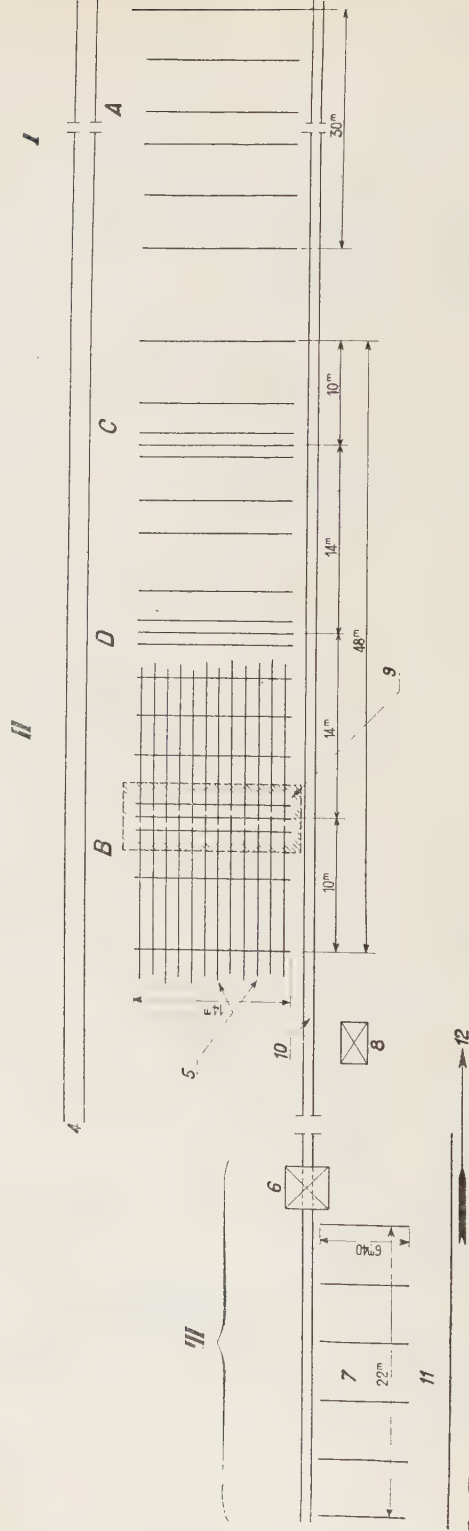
Layout of a thermit-pressure welding shop.
